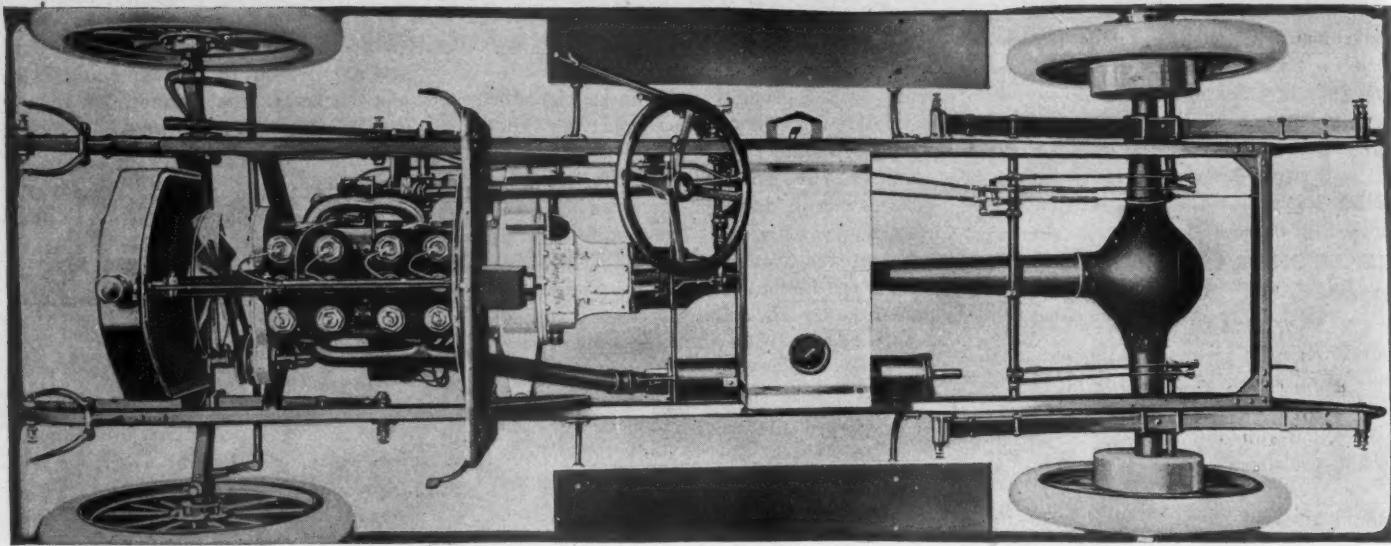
TOP VIEW OF OHIO 1911 CHASSIS USED FOR FOUR MODELS SHOWING PRESSED STEEL REAR AXLE AND TORSION TUBE
